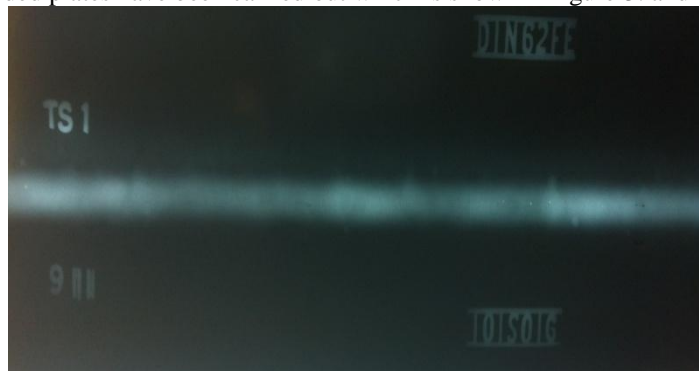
X-Ray Radiography of low heat input welded plates
